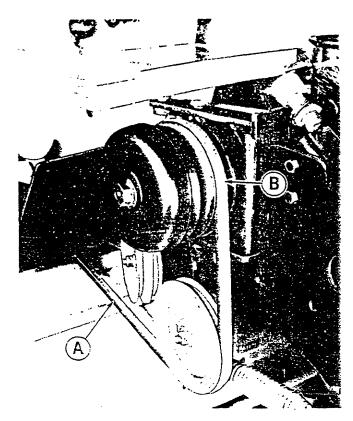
Mower drive belt installed on inner groove of power take off pulley.
